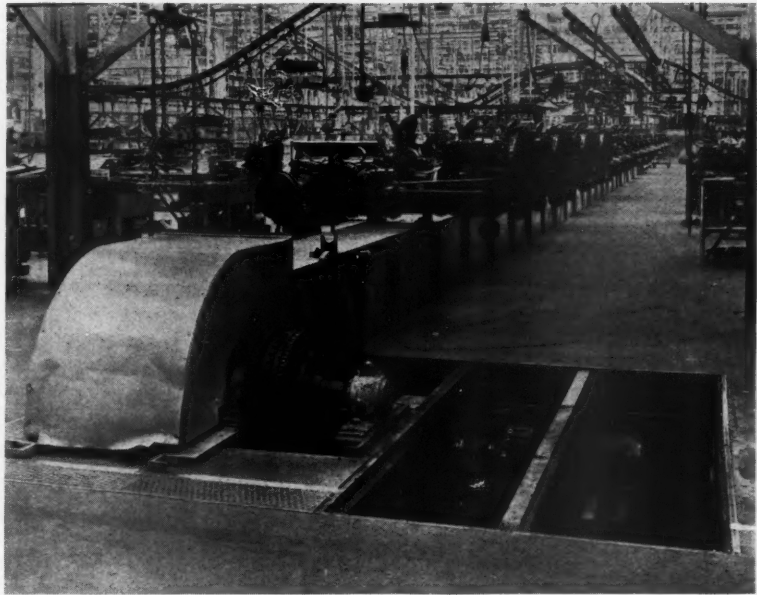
The drive unit for the assembly conveyor at Standard Motor Co. Ltd., Banner Lane works
